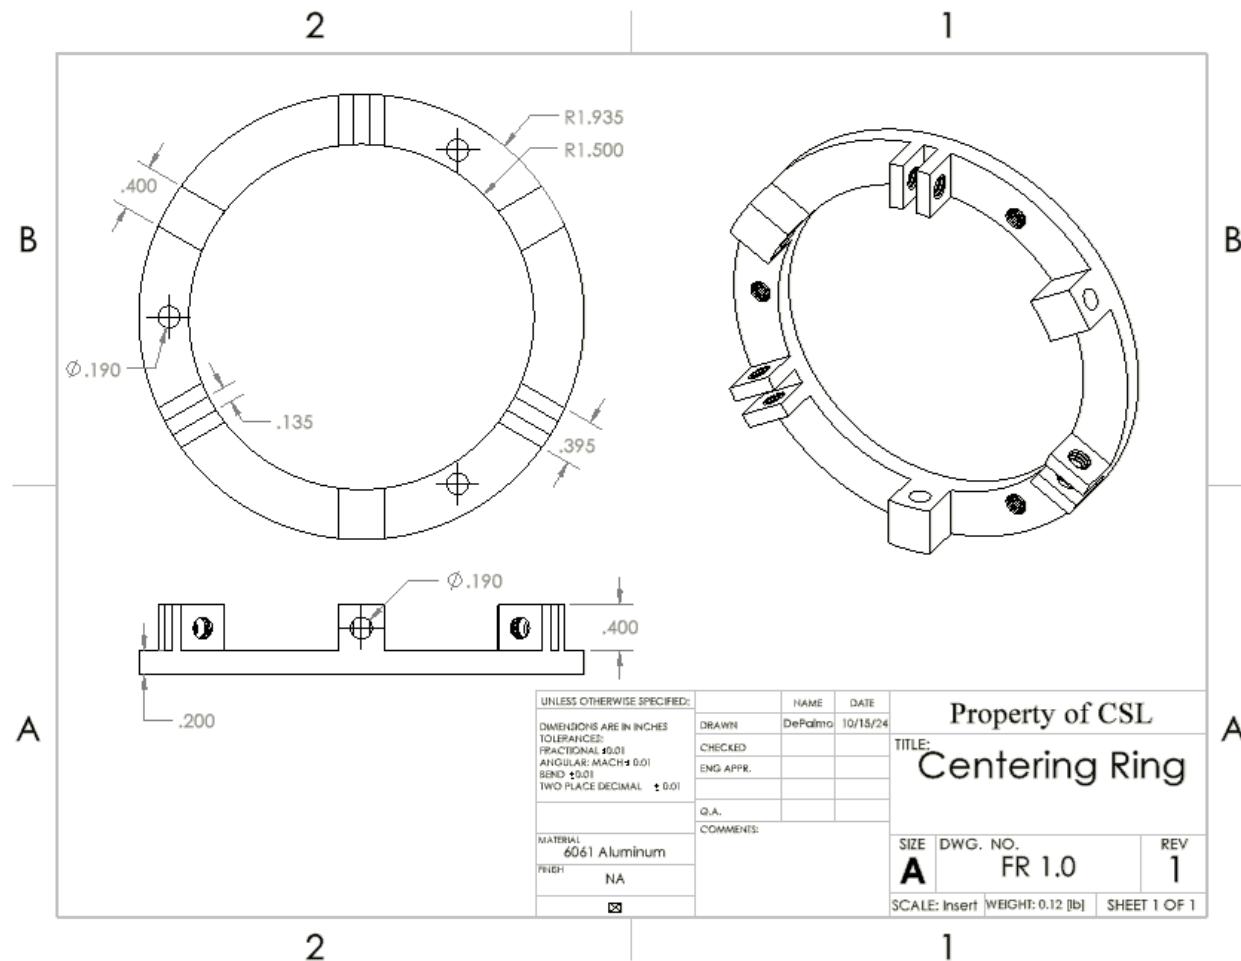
SolidWorks Drawing of Centering Ring.
